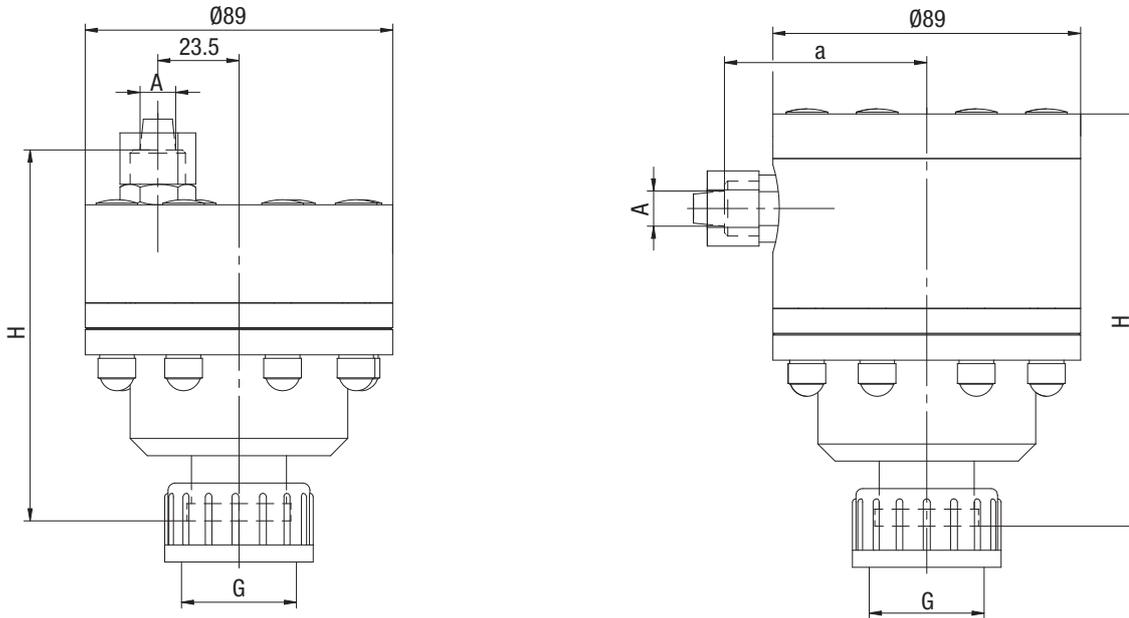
Dimensional drawing ejector non-return valve without back pressure regulator (left) and ejector non-return valve with back pressure regulator (right)
